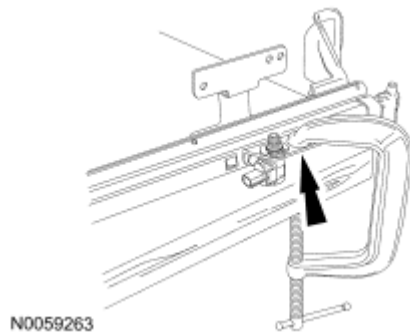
Clamping Side Plate To A Bench Or Table To Compress Spring Washer On Affected OCS Weight Sensor Bolt
